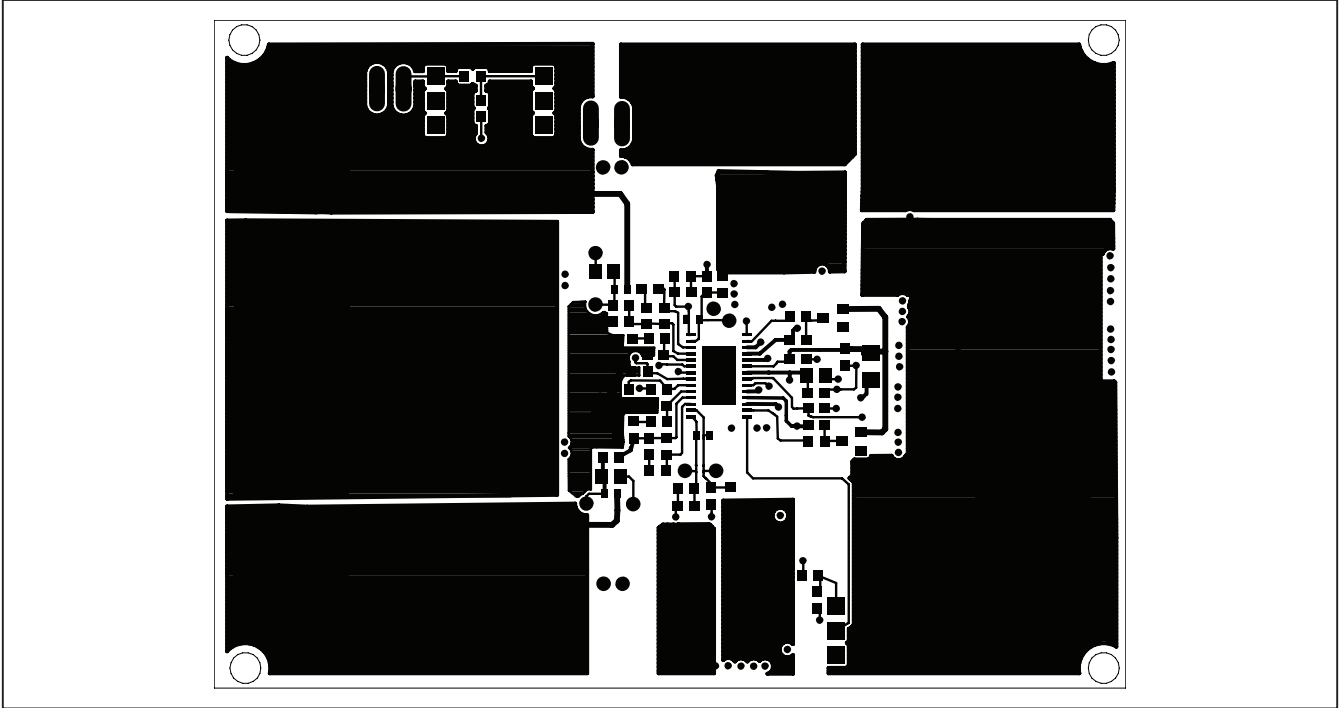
MAX15034B EV Kit PCB Layout—Solder Side
